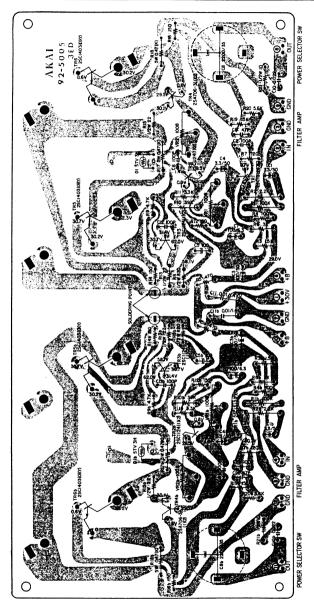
POWER AMP. P.C. BOARD 92-5005 (Reverse)
